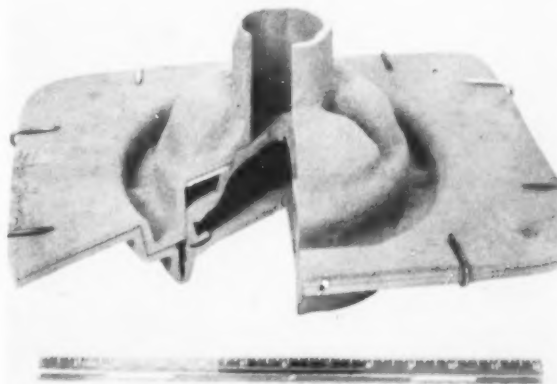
This photo illustrates a comparatively complex shell mold to demonstrate the ease with which mold sections can be made to fit together.
